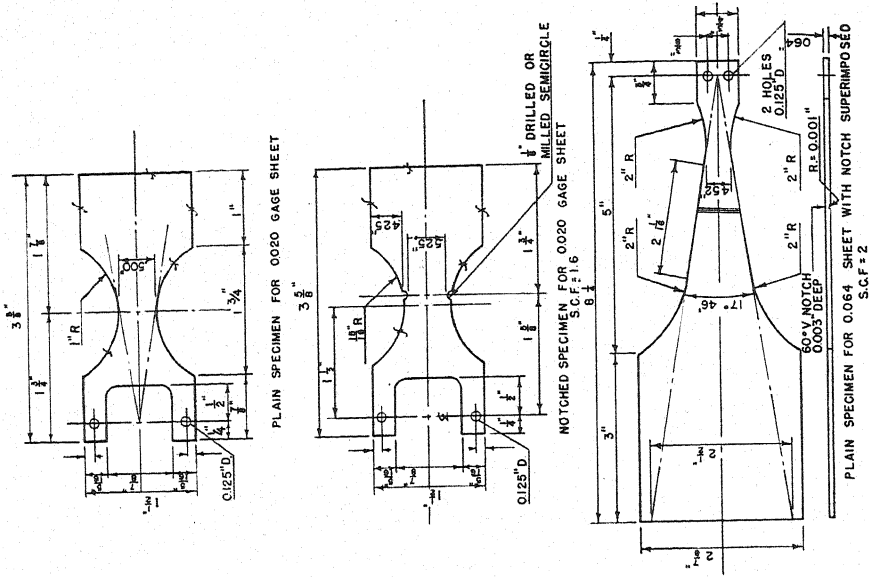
Dimensions of the Specimens Used for Plate Bending Fatigue Tests.
